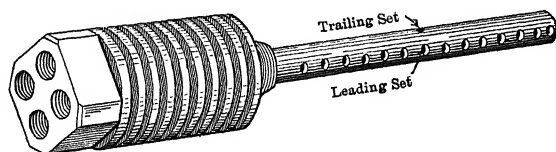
NOZZLE PLUG, G. E. CO'S STEAM METER.
